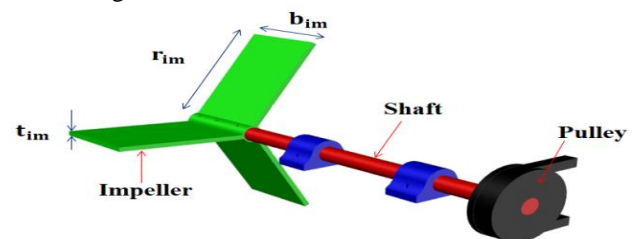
Cracking unit Shaft with Impellers and Pulleys
